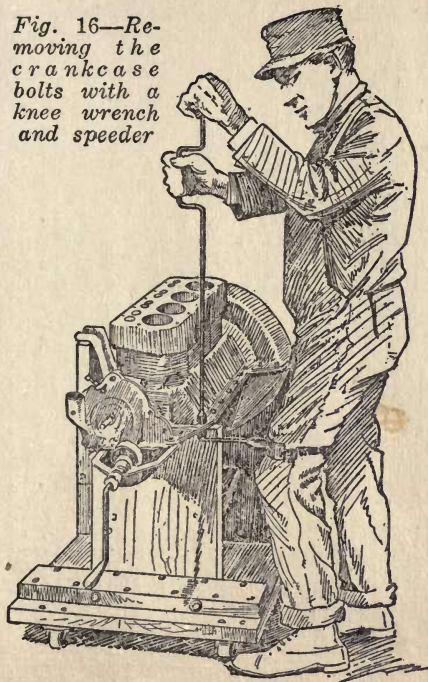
Removing the crankcase bolts with a knee wrench and speeder
